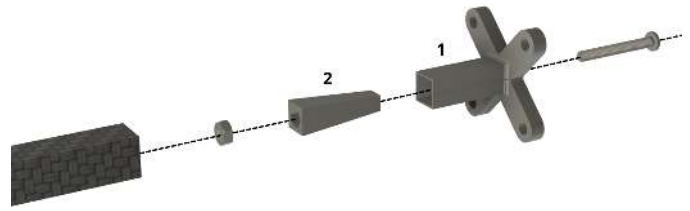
3D printed PETG support of the main engine to the carbon tube
